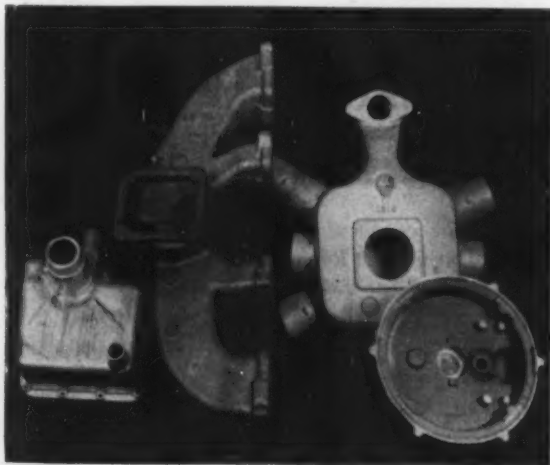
Indicative of the wide variety of castings being impregnated by Approved Casting Impregnating Co. At left is an Al diecasting, next a cast iron manifold, next a Mg aircraft intake manifold, and a bronze pump casting.
